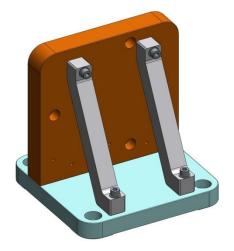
Final Horizontal L4-C Bracket Assembly.
